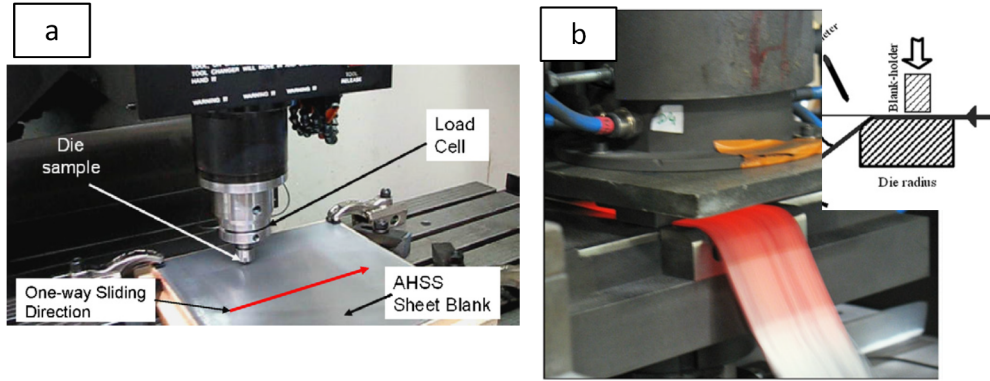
Tribometers under stamping conditions: (a) die wear test system by Cora et al [105], (b) deep-drawing process simulator by Boher et al [106].
